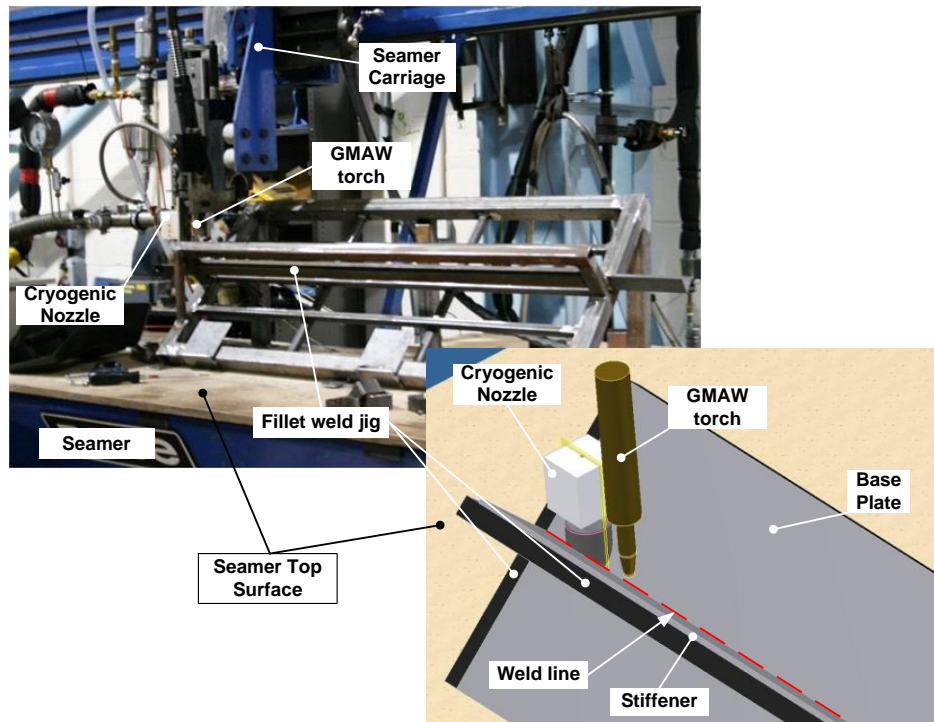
TTC fillet weld experimental setup on seamer
